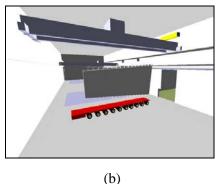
a) Internal welding; b) Horizontal stiffening; c) External panels.
